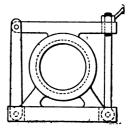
Jig for Holding a Cylinder During the Milling Operation
